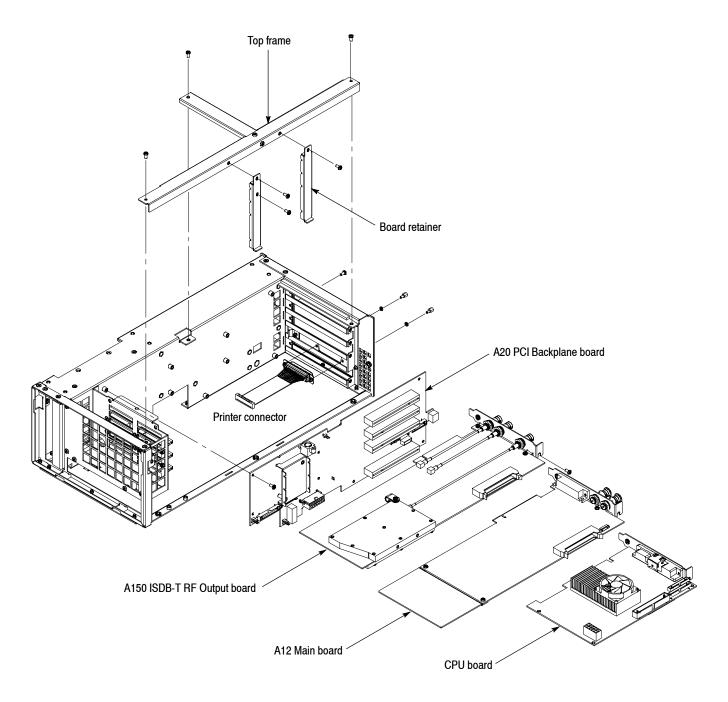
A150 RF Output board, A12 Main board, CPU board, and A20 PCI Backplane board removal
